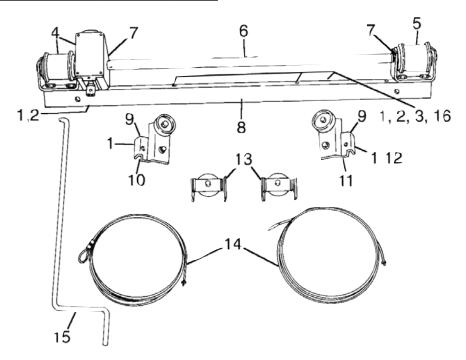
Exploded view and parts list for KA146W2 tank-lifting windlass.
